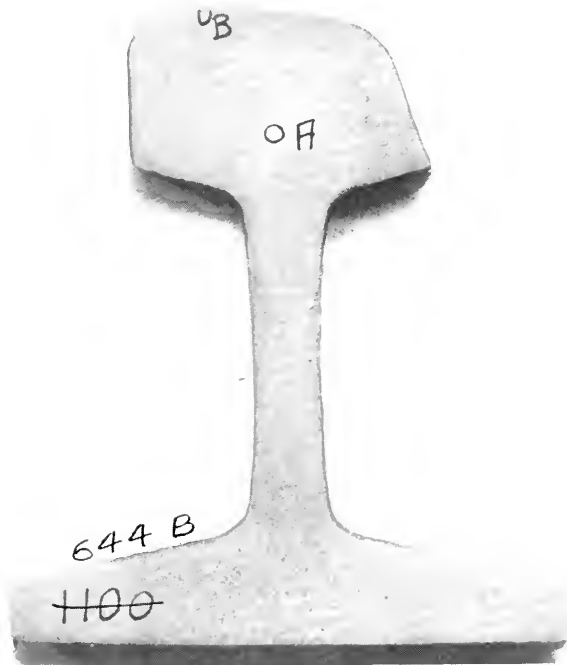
B. LIGHT ETCHING OF RAIL 644.
